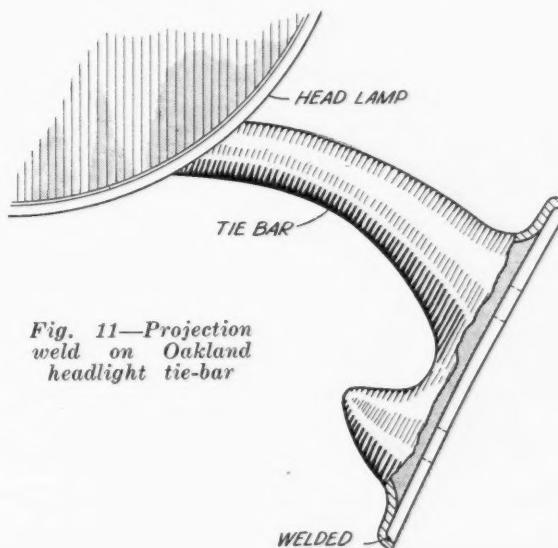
Projection weld on Oakland headlight tie-bar
